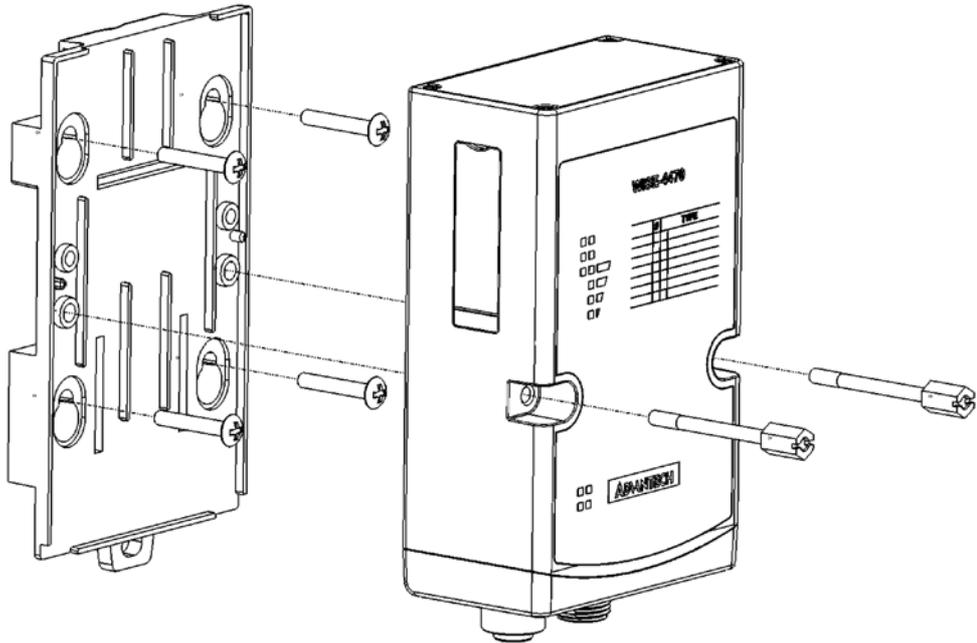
WISE-4470 DIN-rail Mounting (front)
